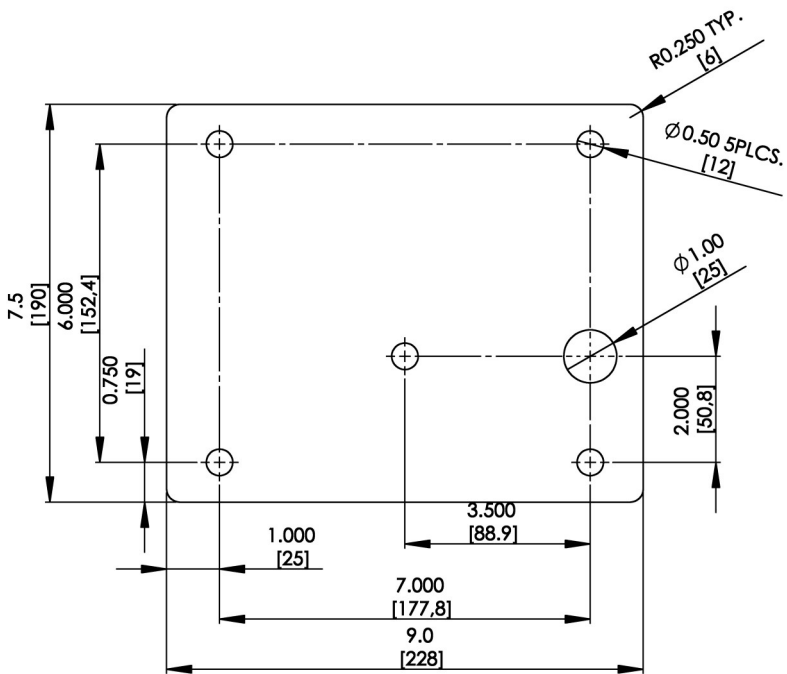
Contractor supplied mounting plate (dimensions are inches [mm]).
